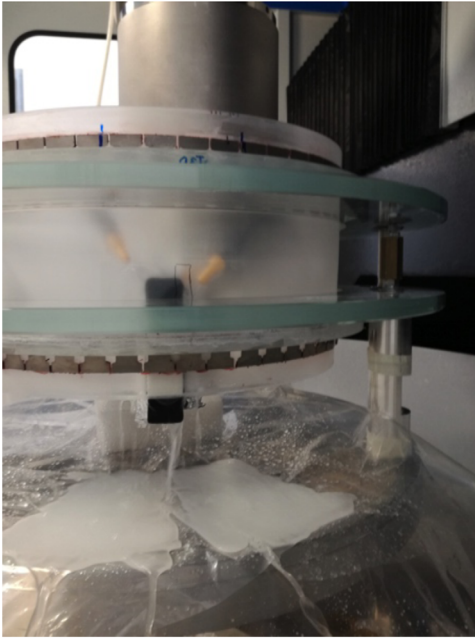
The pitch tool equipped with TRizact 3M™ is fixed on the robotic arm of the Zeeko machine and the vertical carriage movement has been used to move the tool up and down.
